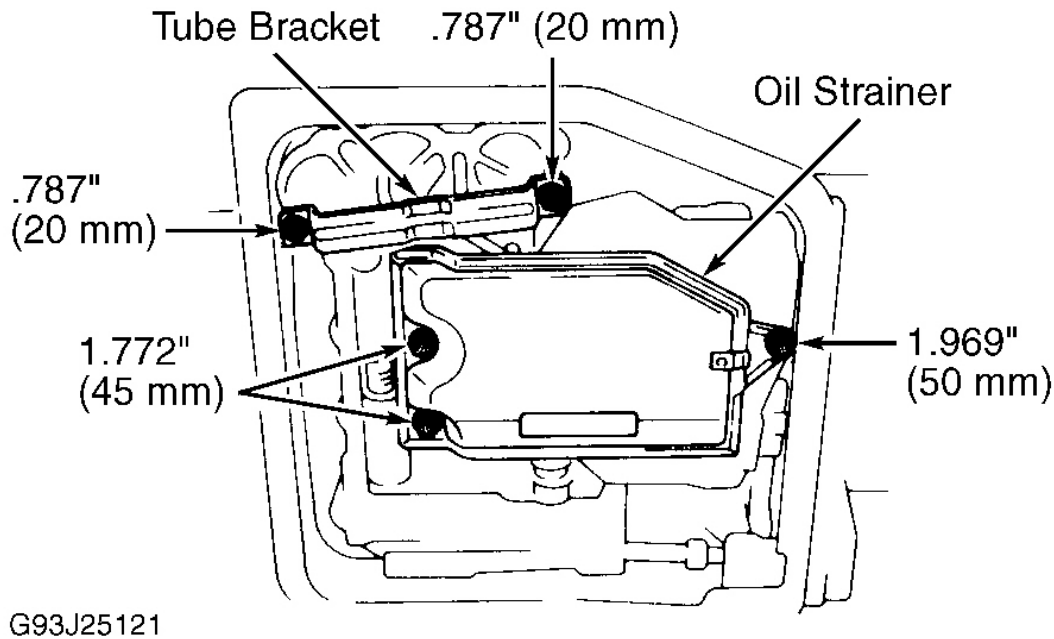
Tube Bracket I.D. & Oil Strainer Bolt Length & Location
